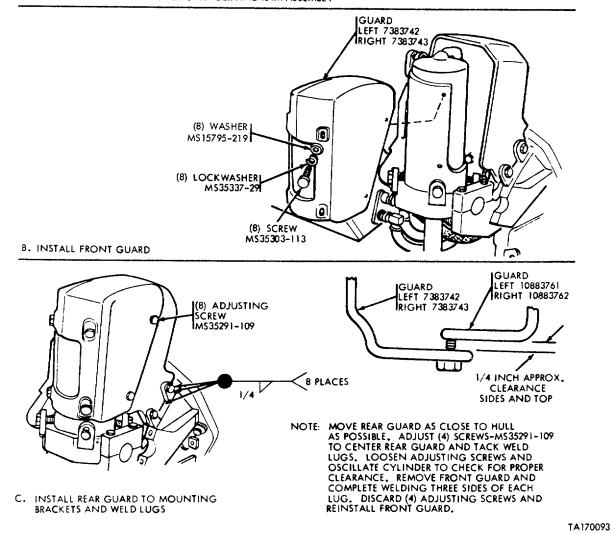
Installation of cylinder guards (sheet 1 of 2).
